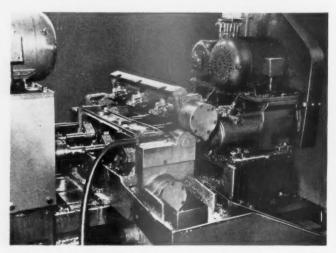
The set-up for rough and fine boring the gudgeon pin holes on an Ex-Cell-O machine
